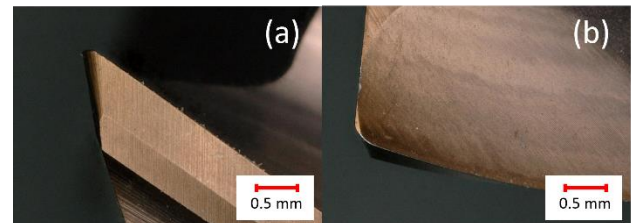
Microscope images of a new tool (a) flank and (b) rake faces.
